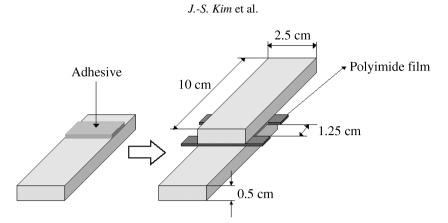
Diagram showing dimensions of a single-lap shear test specimen.
